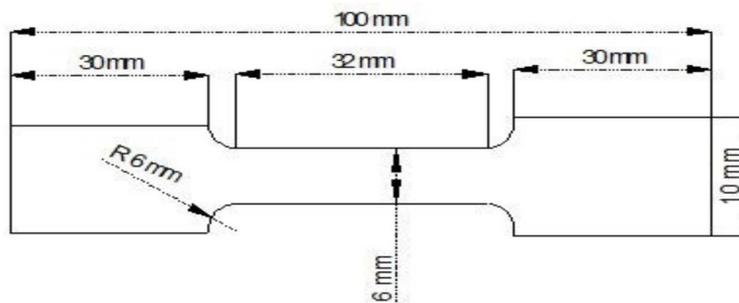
ASTM E-08 sub size tensile test specimen. ASTM E-08 sub size tensile test specimen.[7]
